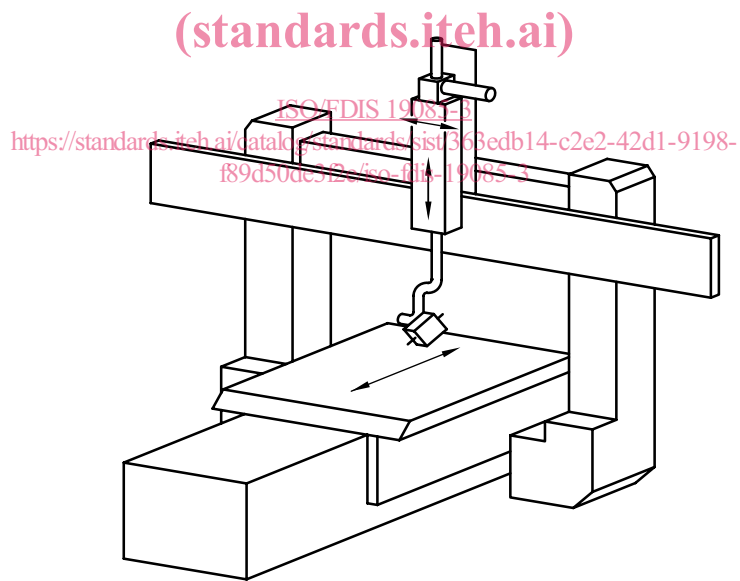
Example of a machining centre with moving table, fixed portal, moving machining head
